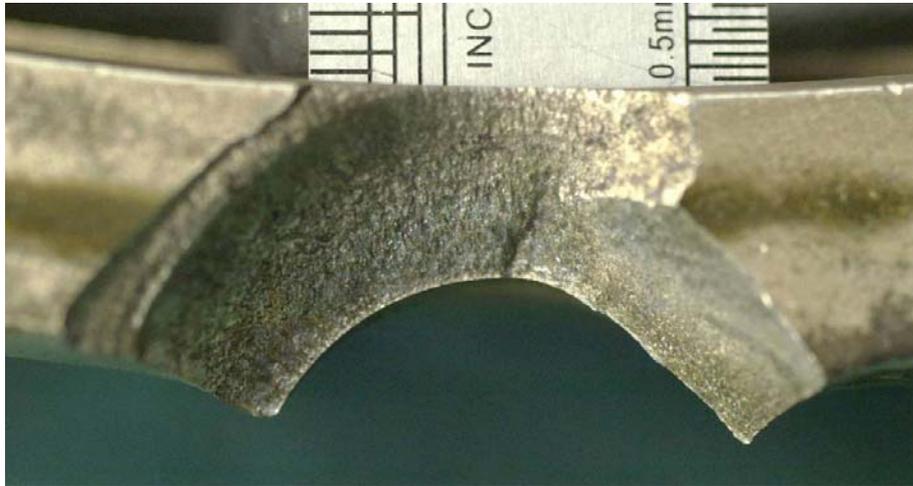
&b View of opposing fracture surfaces in lug 13.
